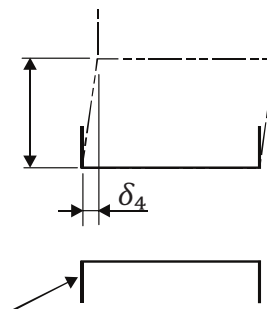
Perpendicularity in movement of top platen (projection welding)
